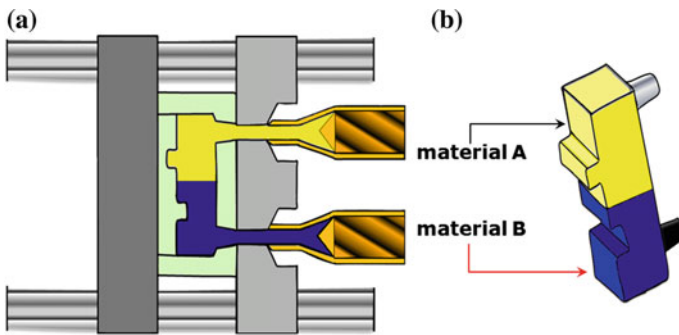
Schematized bi-injection molding process. a After injection. b Finished part
